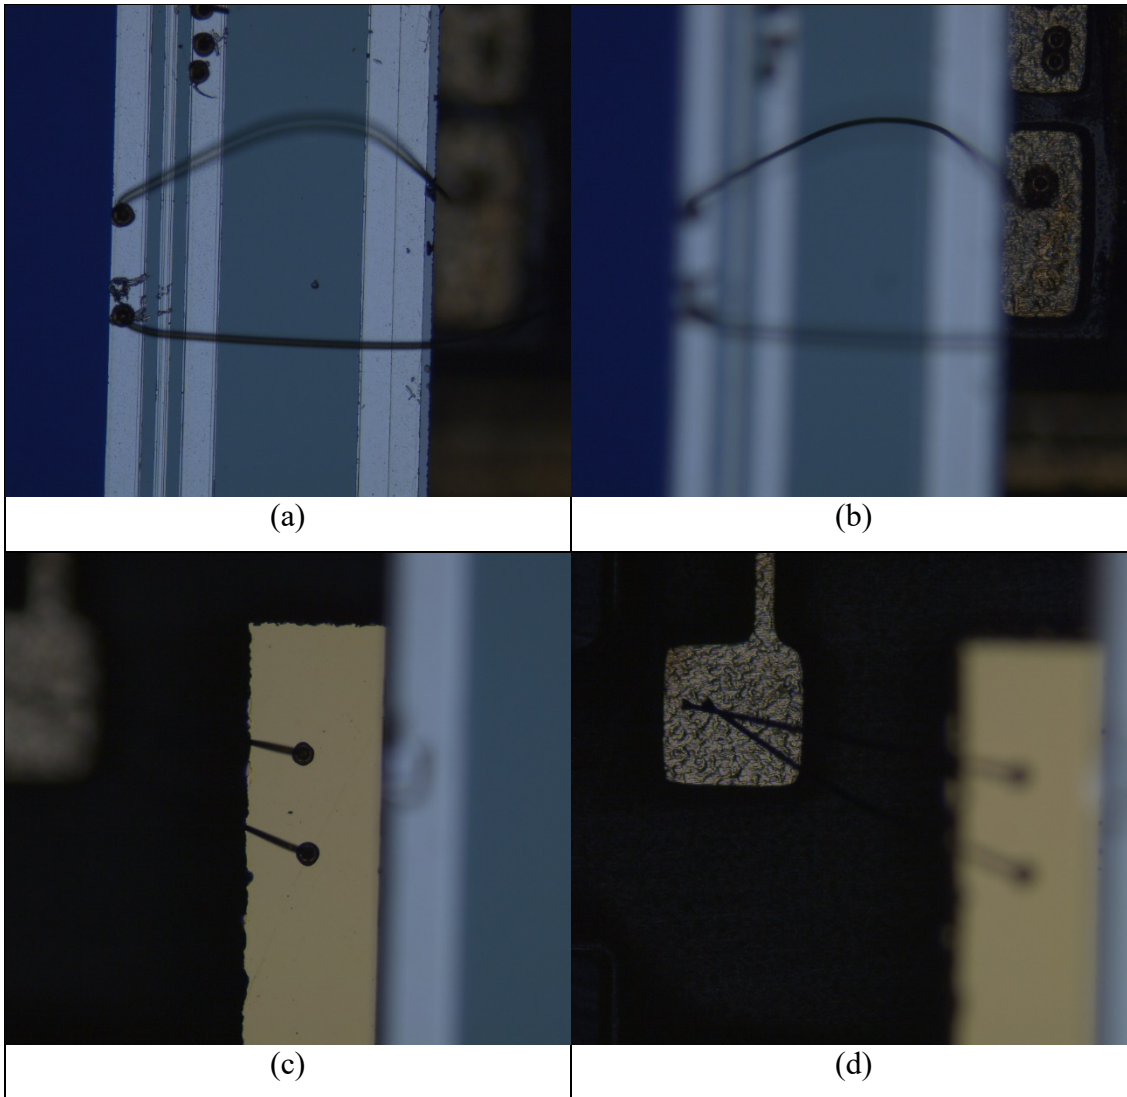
(a) Shows the photodiode positive contact wire bonded. (b) Shows wire bonding connection of positive contact to the bottom PCB. (c) Shows the photodiode negative contact wire bonded. (d) Shows wire bonding connection of negative contact to the bottom PCB.
